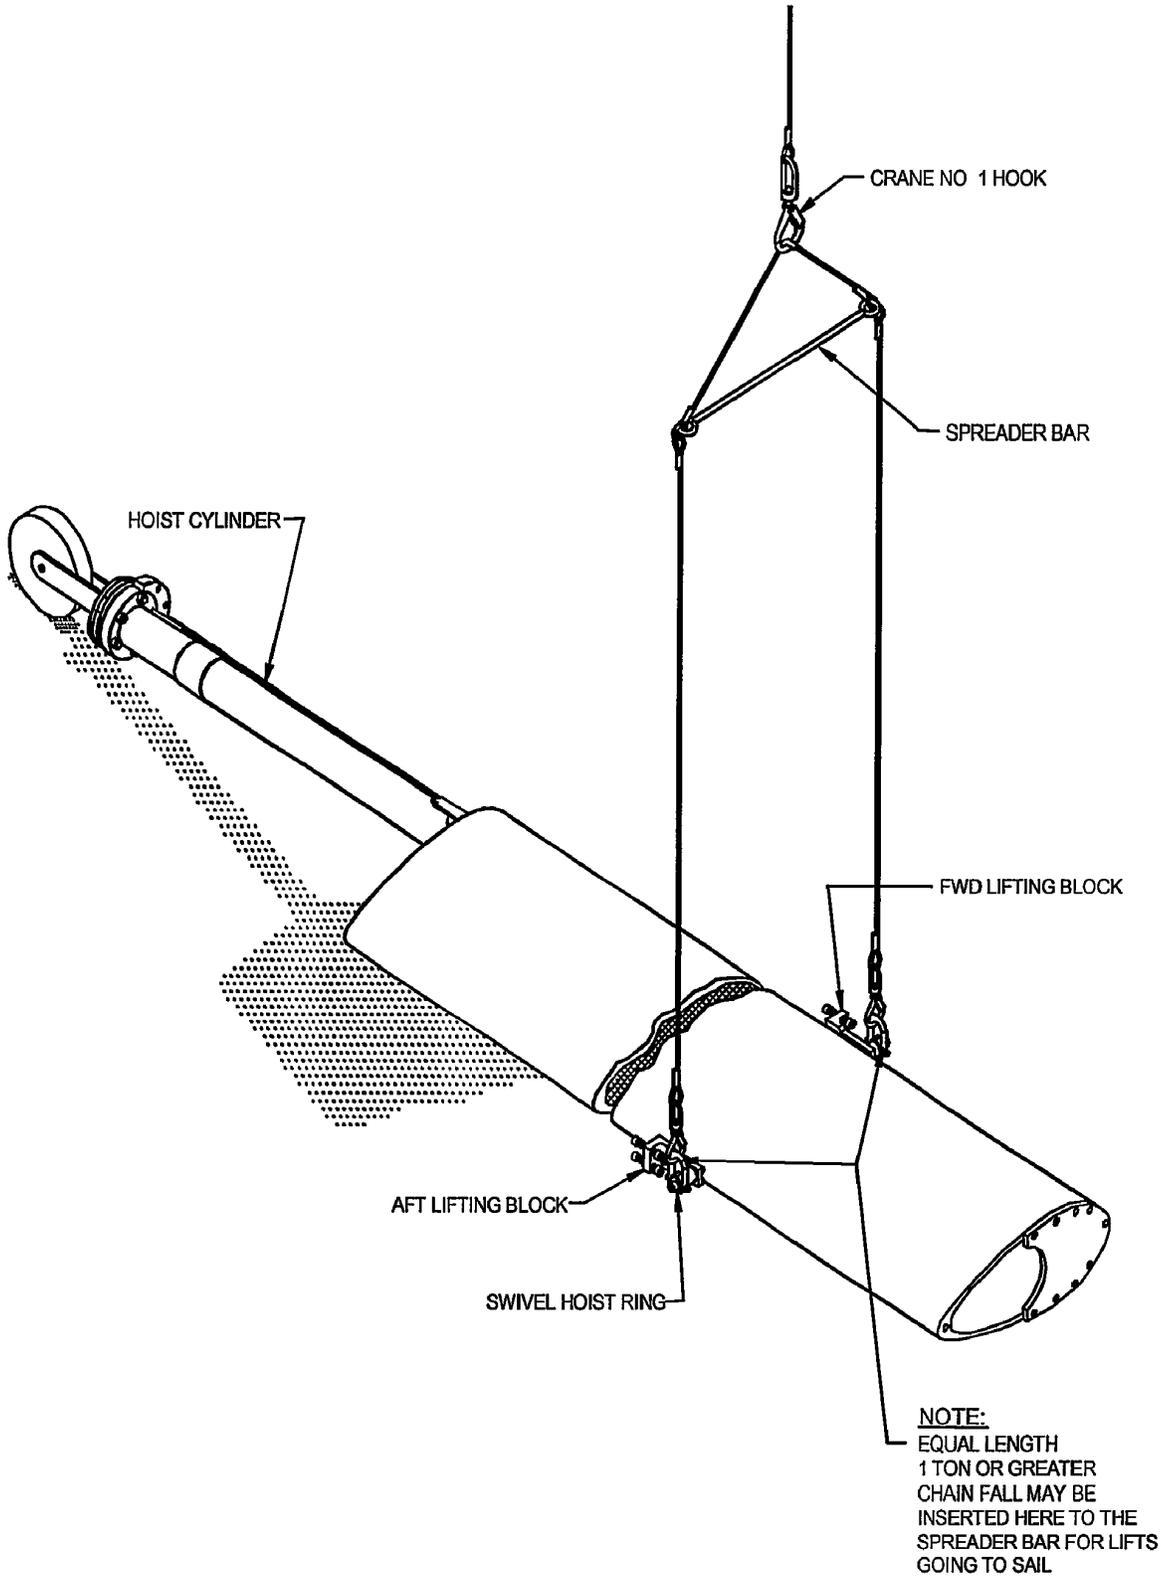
One Hook HDR and ACM Faired Mast Lifting Arrangement Horizontal Position
